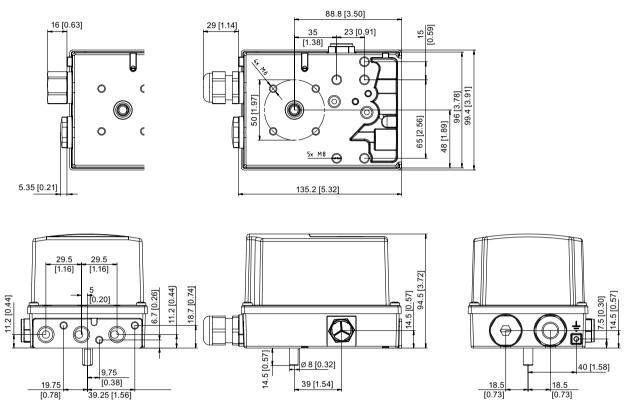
Dimension drawing, dimensions in mm (inch)
